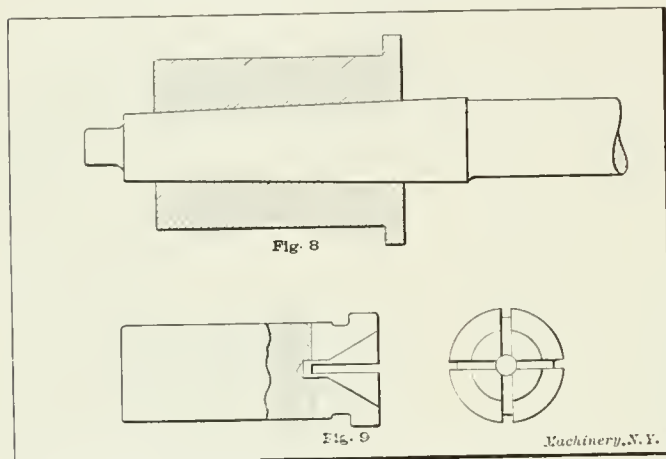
Bushing for Holding Taper Shanks in a Chuck. Fig. 9. "Driver" for Small Reamers provided with a Square
